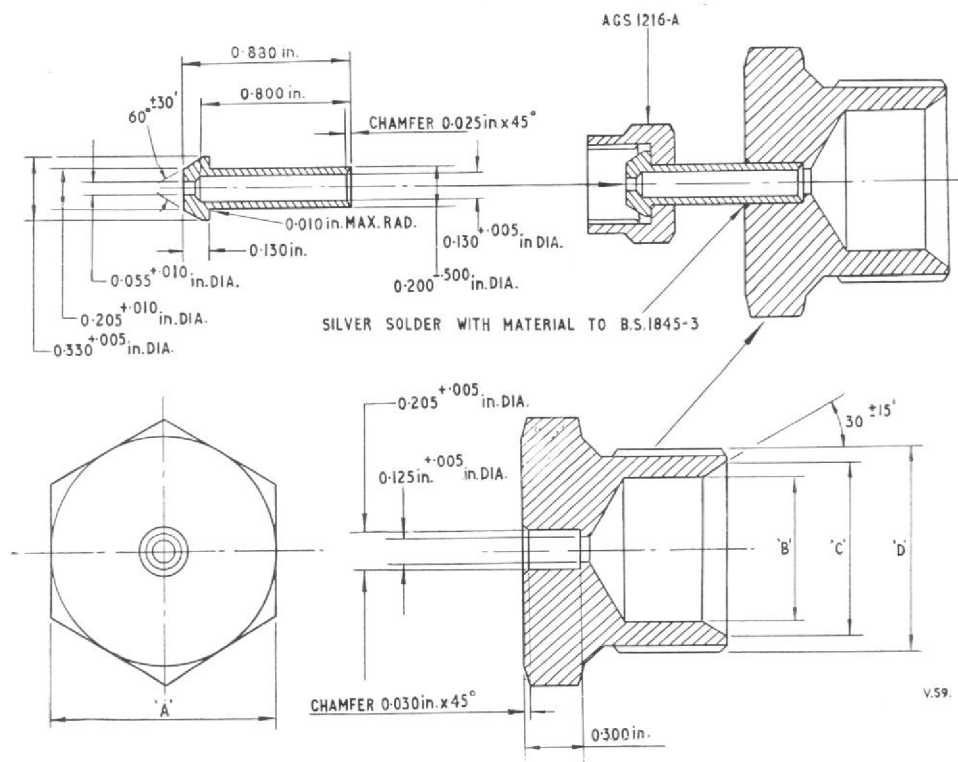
Adapter for pipes terminating with a union nut ; for dimensions A, B, C, and D, see table below.
